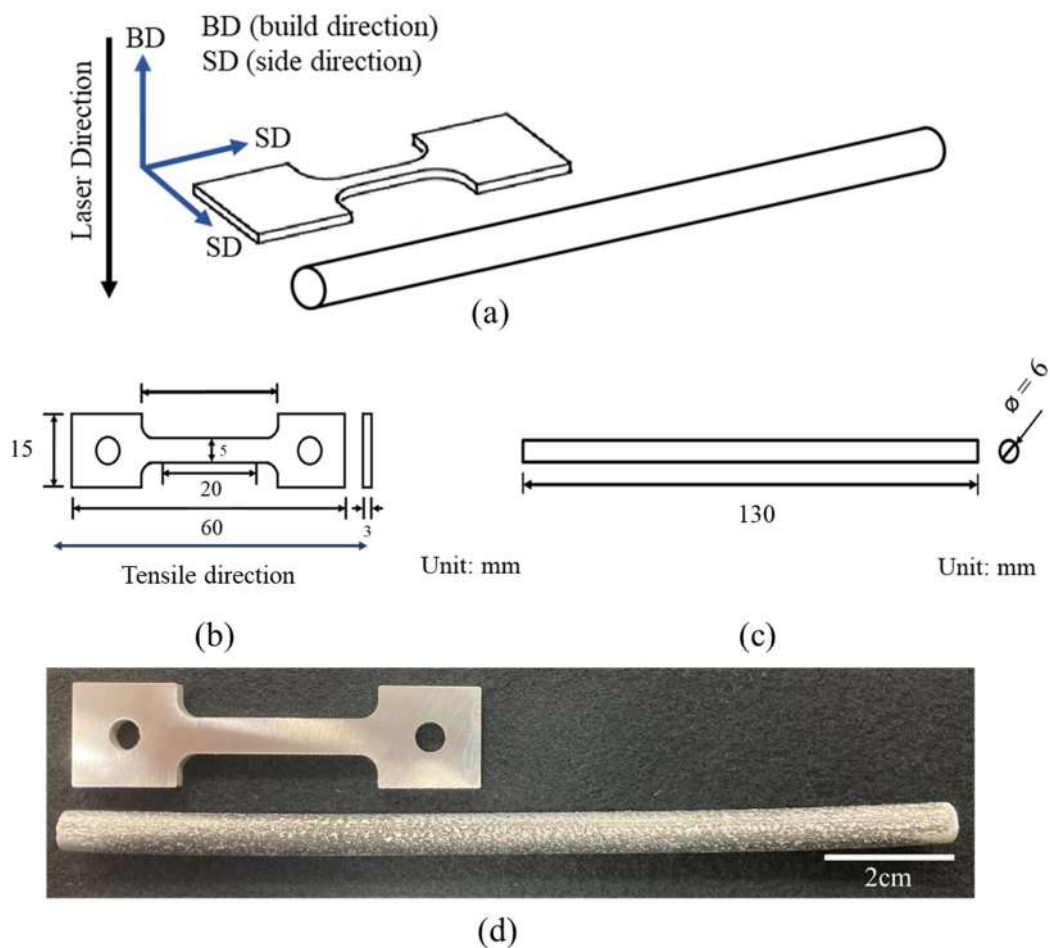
Schematic of the specimen of the Al-Ni-Cu alloy: (a) manufacturing direction, (b) tensile specimen, (c) fatigue specimen, and (d) macroscopic morphology photographs.
